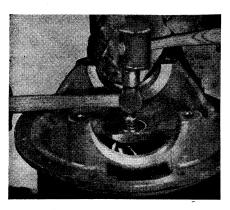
Use ball peen hammer to drive out bevel pinion assembly, noting shims under pinion bearing cage
